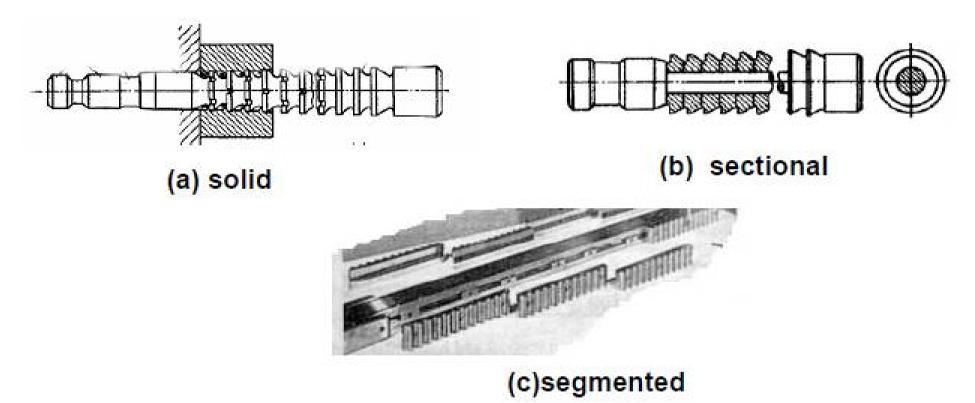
(a) Solid, (b) Sectional and (c) Segmented broaches.
